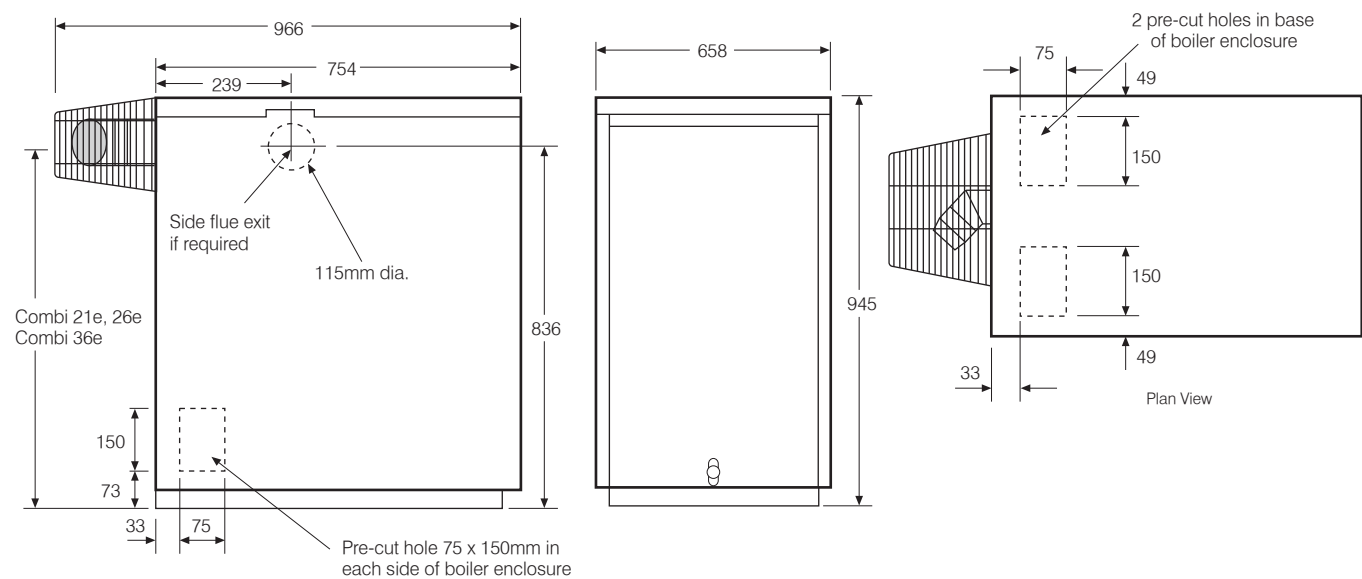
21, 26 and 36kW External Combi dimensions
